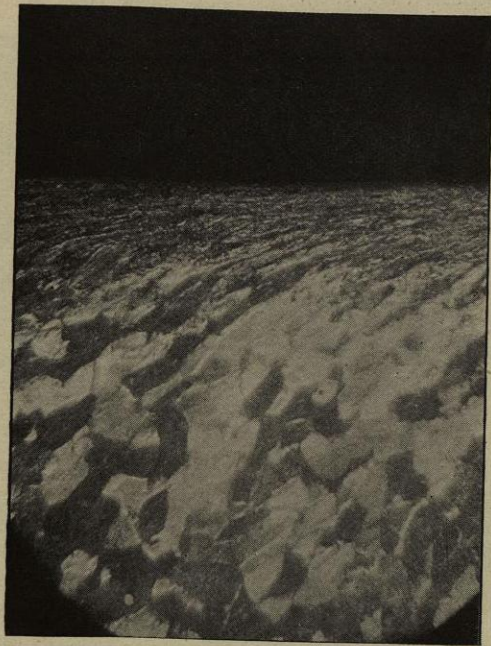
Side of drill hole in a boiler plate, crushed by using a blunt drill.  $\times 250$ .
